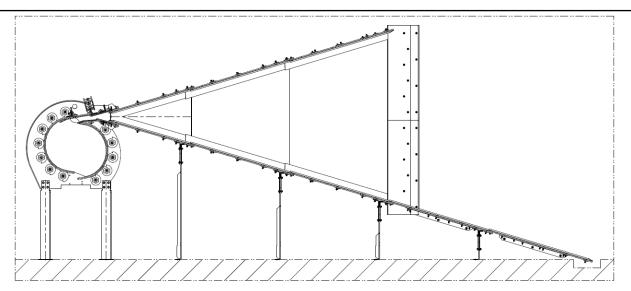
3X5 TRAP PLATE LAYOUT
